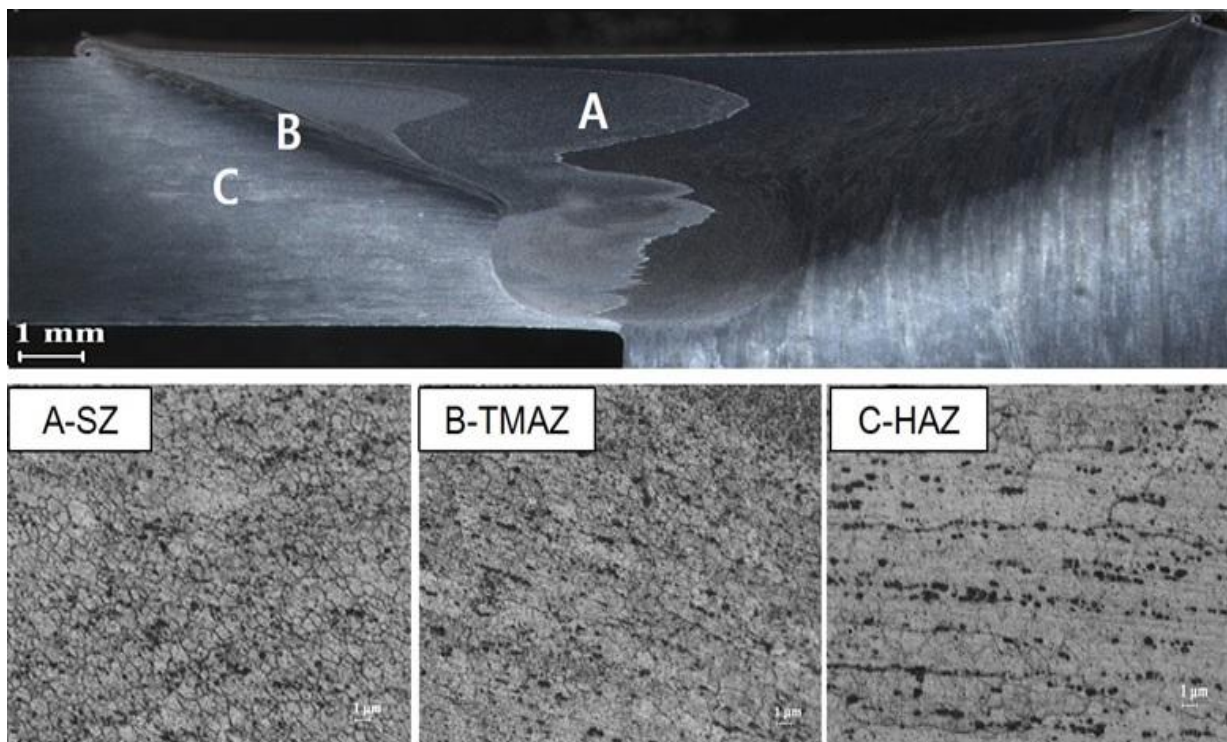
Cross section of FSW corner welded joints
